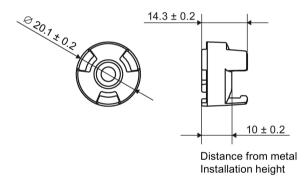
Dimension drawing of spacer 6GT2690-0AG00
